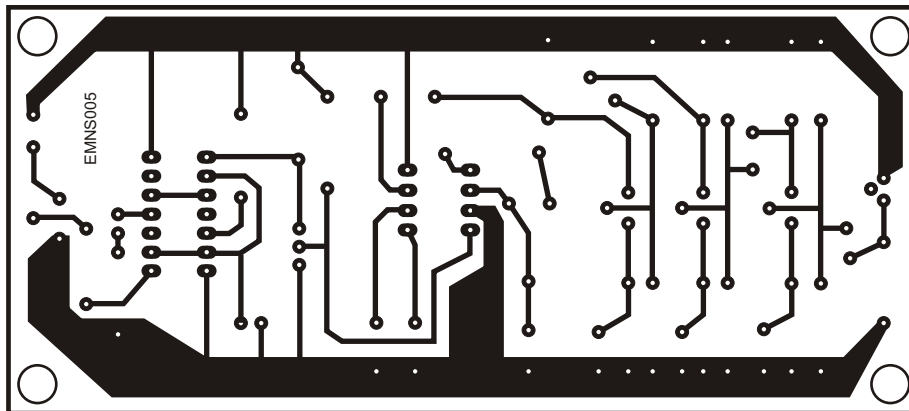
Actual - size, solder-side PCB layout for the receiver unit.
